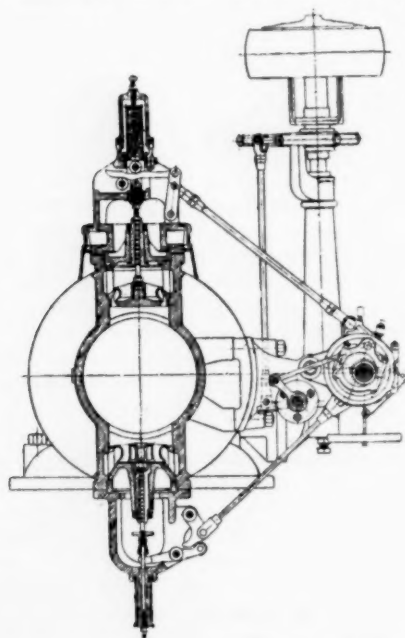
VALVE GEAR OF THE ATLAS PASS-OUT ENGINE
